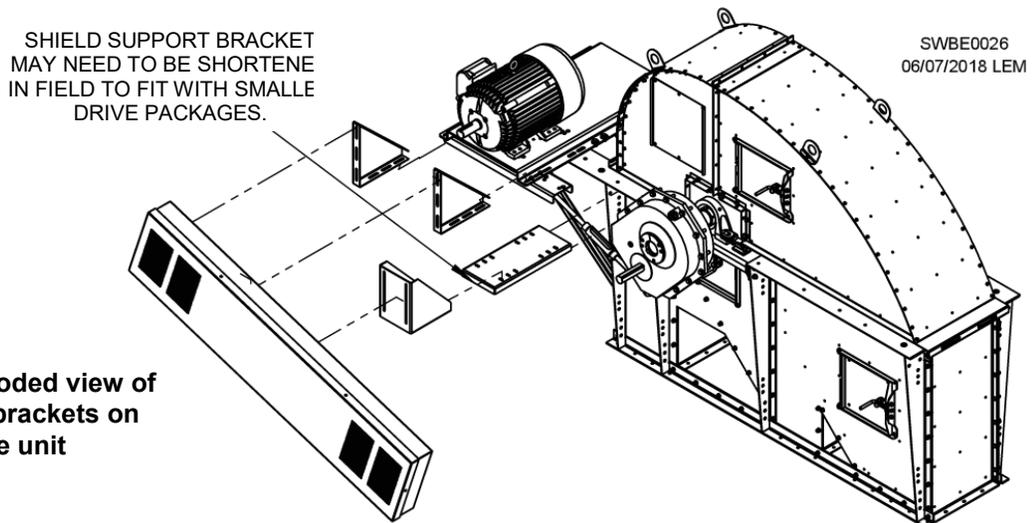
Exploded view of belt shield & brackets on left-hand-drive unit
